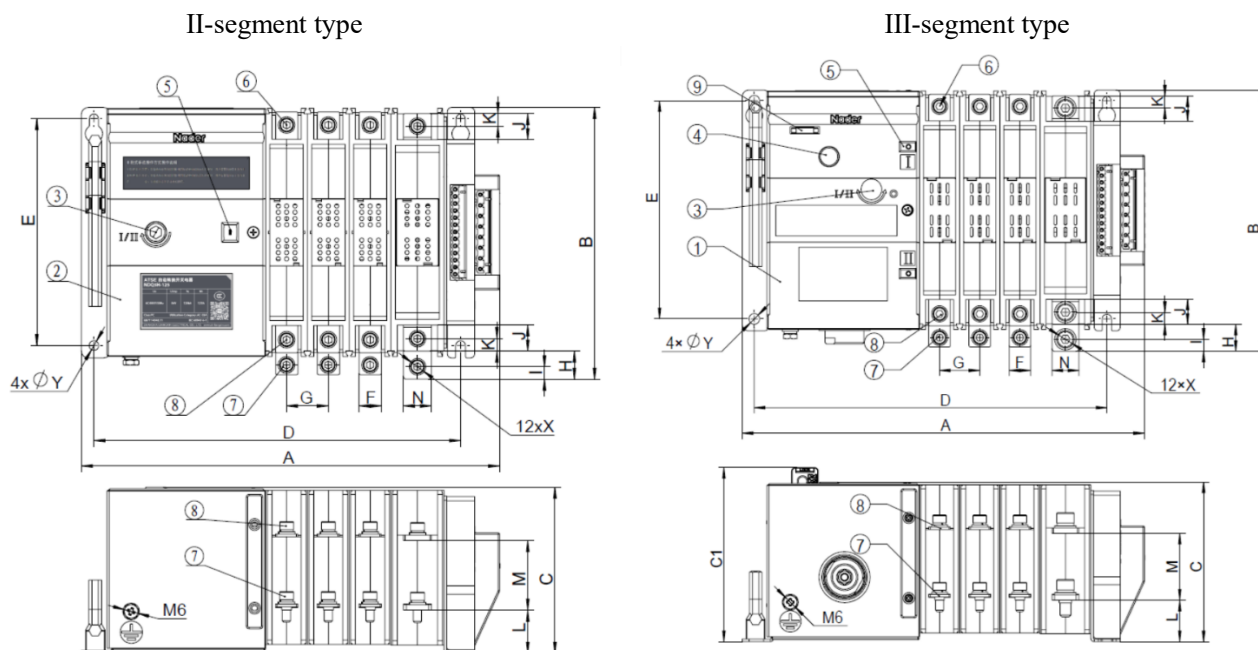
External dimensions and mounting dimensions of the split switching mechanism body
